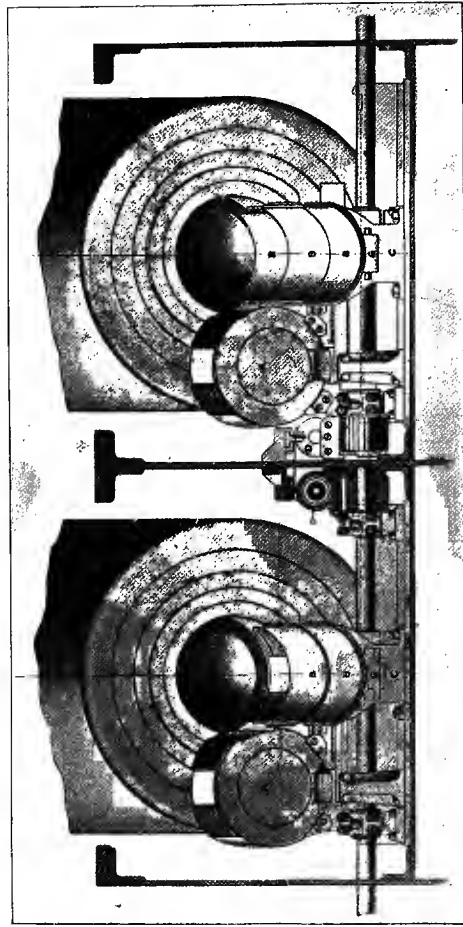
HYDRAULIC BREECH MECHANISM FOR 67-TON GUNS. END VIEW.
